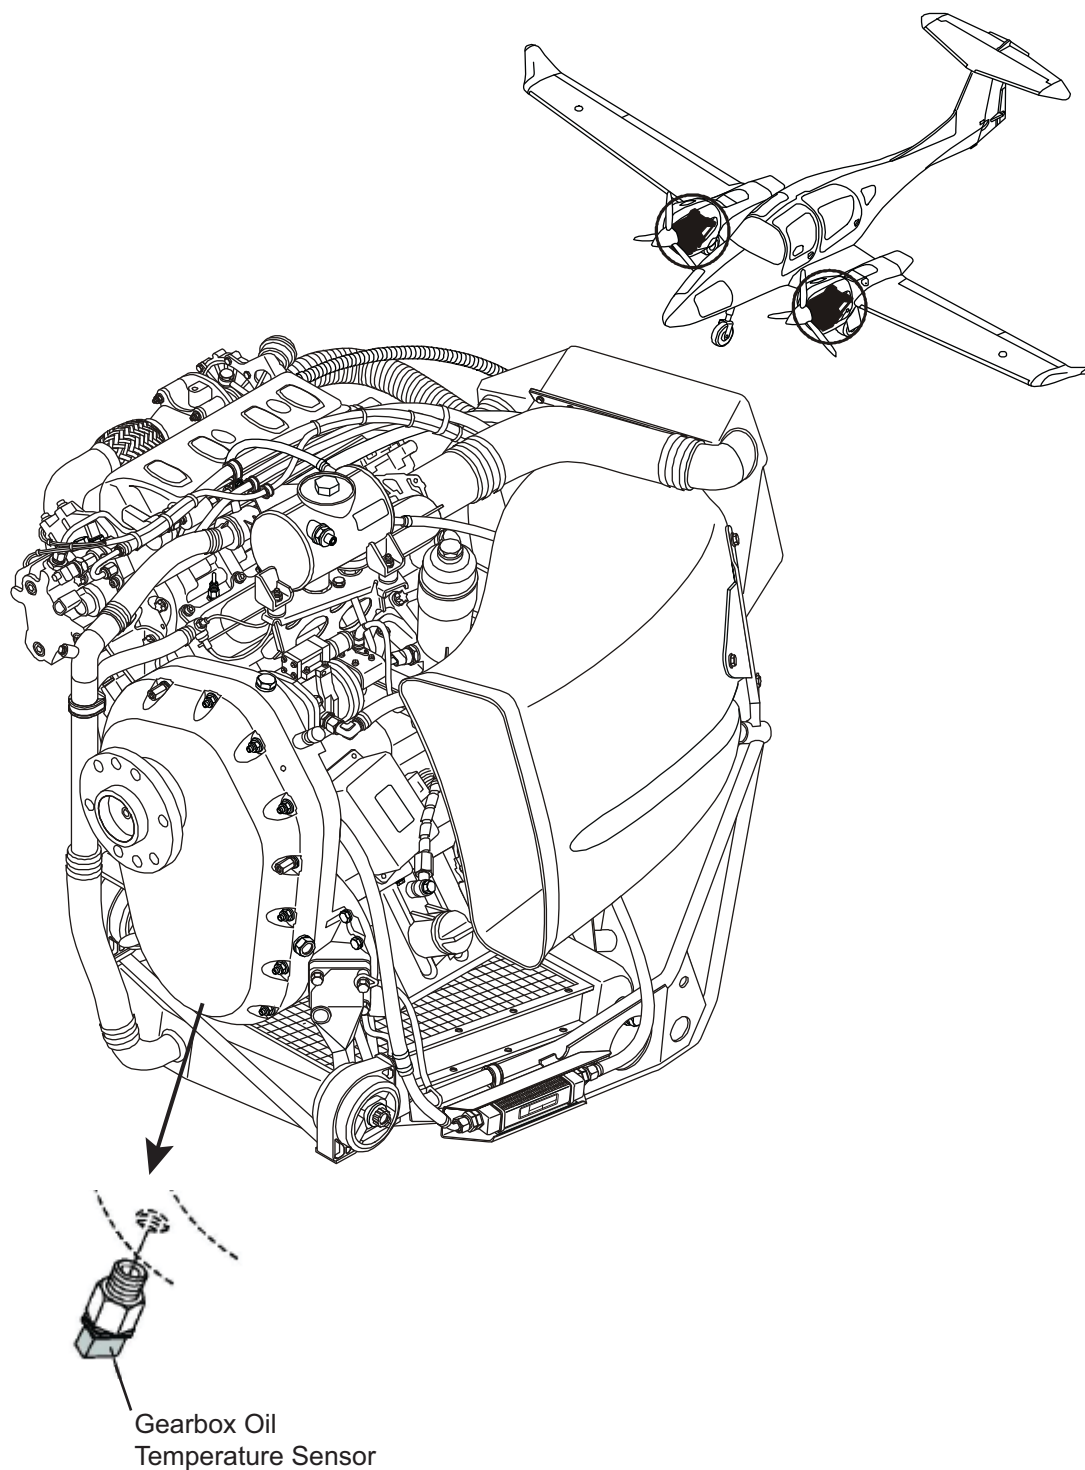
Gearbox Oil Temperature-Sensor - Installation
